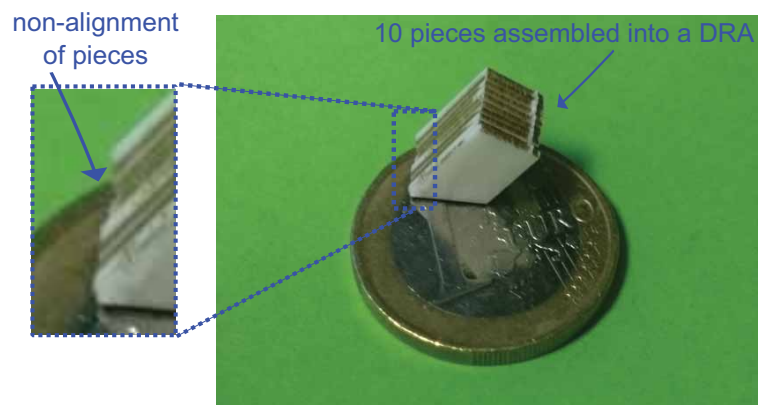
Assembled tilted DRA from laser cut pieces.
